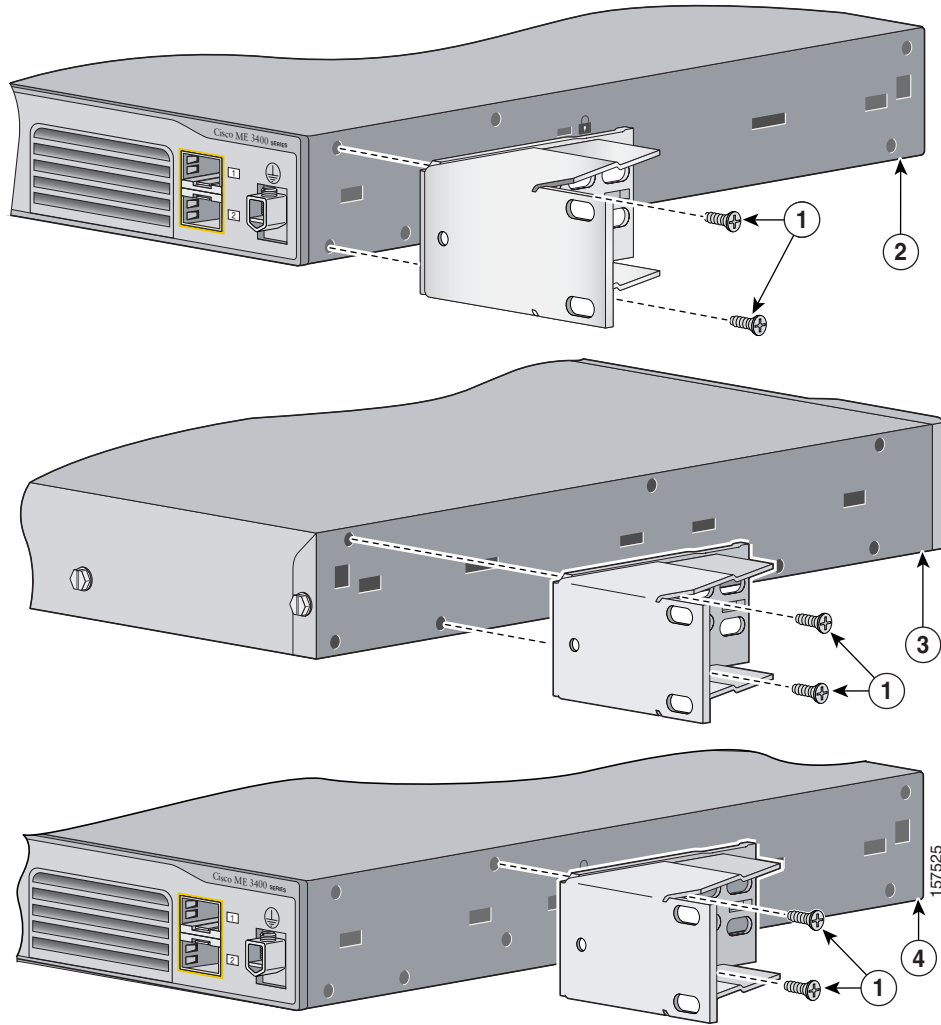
Attaching Brackets to 19-Inch Racks on the Cisco ME 3400G-2CS Switch
